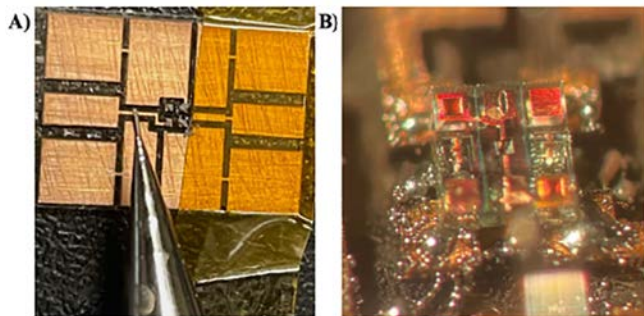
Soldering steps: (A) Low temperature solder paste ejected onto FR4 PCB with laser-patterned copper pads. (B) Metallized DLW print soldered to PCB using flip chip bonder; note the punched-out hole left in the center electrode after attempting to wirebond to it, i.e., underlying polymer is too soft.
